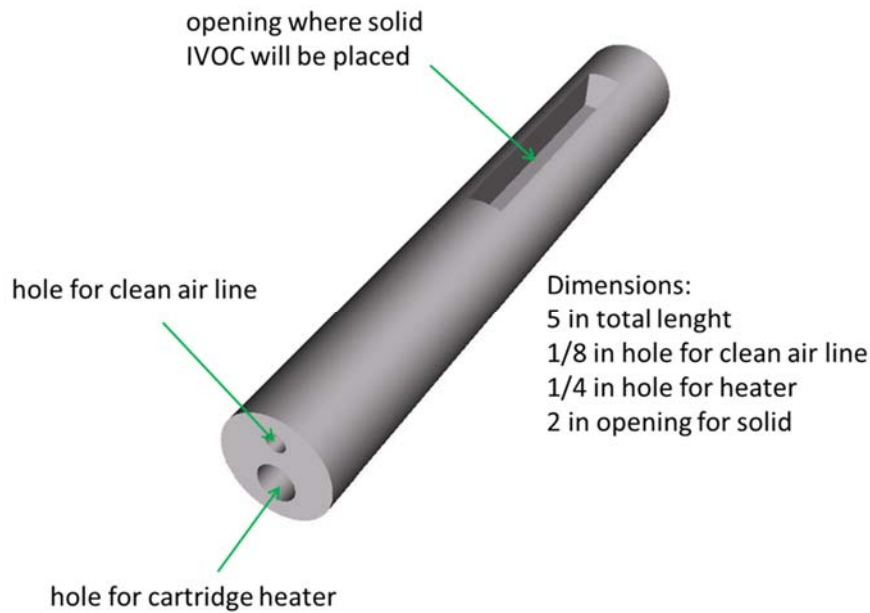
Preliminary drawing of heated injector to be built by a machine shop at UT Austin
